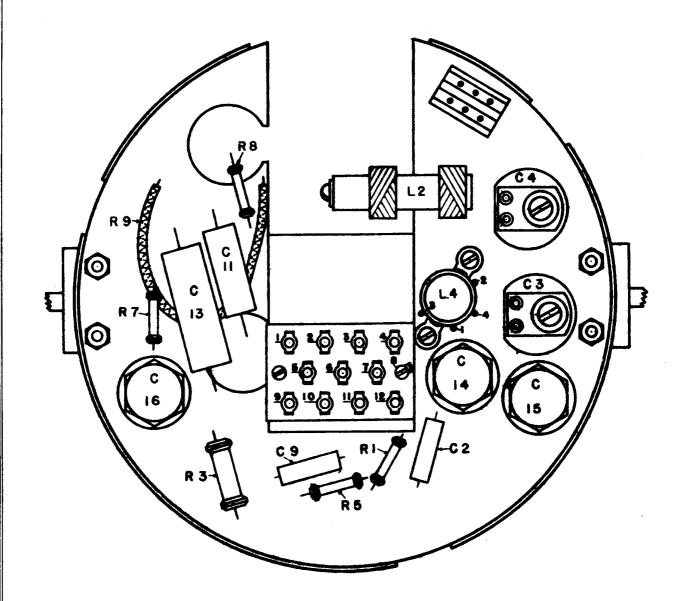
TOP VIEW OF CHASSIS - MODELS 700 - 701 - 702
